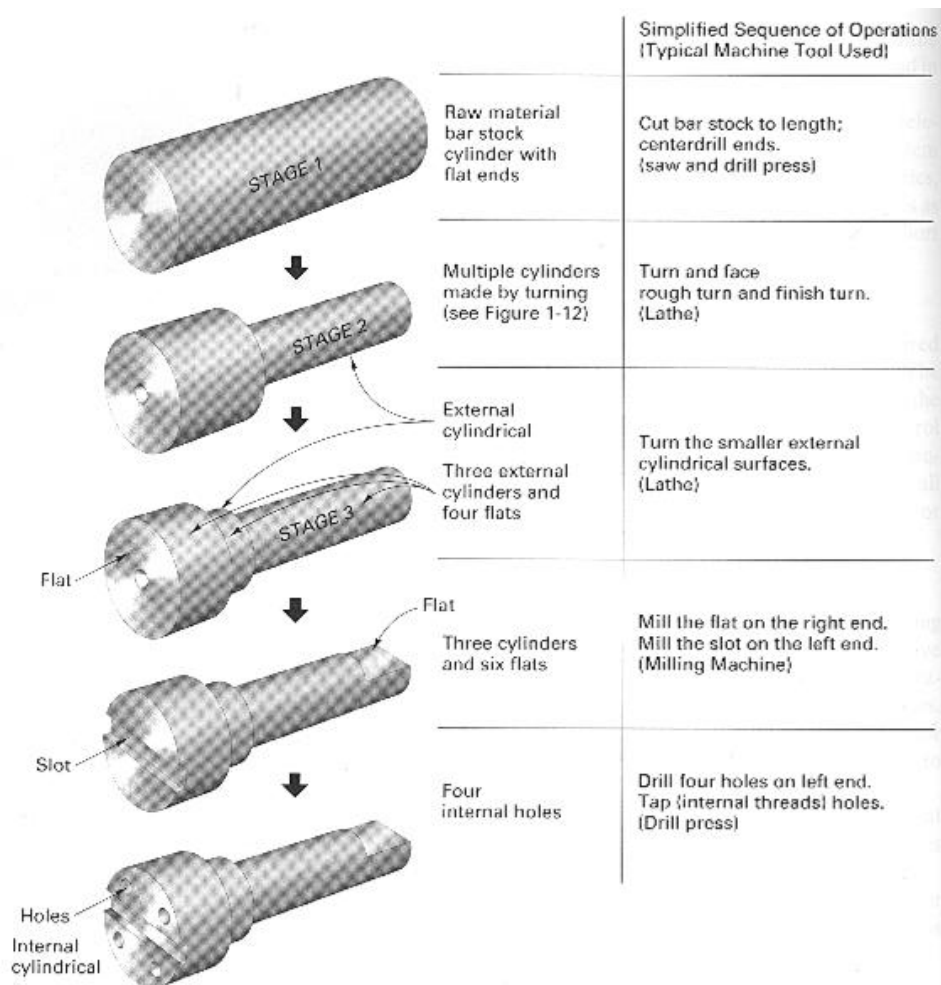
The component called a pinion shaft is manufactured by a "sequence of operations" to produce various geometric surfaces. The engineer figures out the sequence and selects the tooling to perform the steps.
